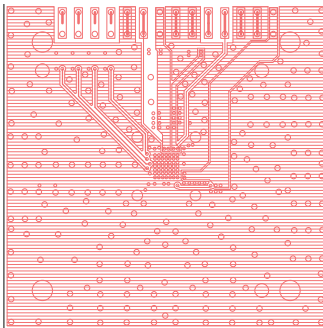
SKY65366-11 Evaluation Board Assembly Diagram
